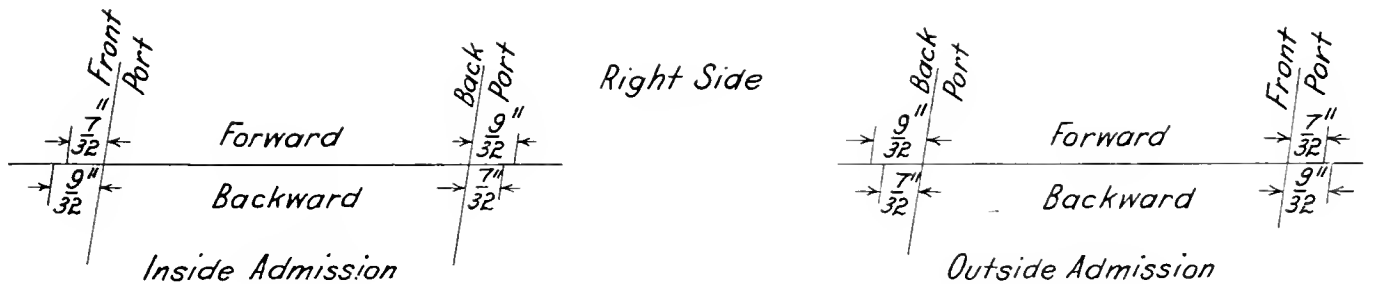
Correct Adjustment of Valves of Baker Gear as Shown by Marks on Valve Stems.
